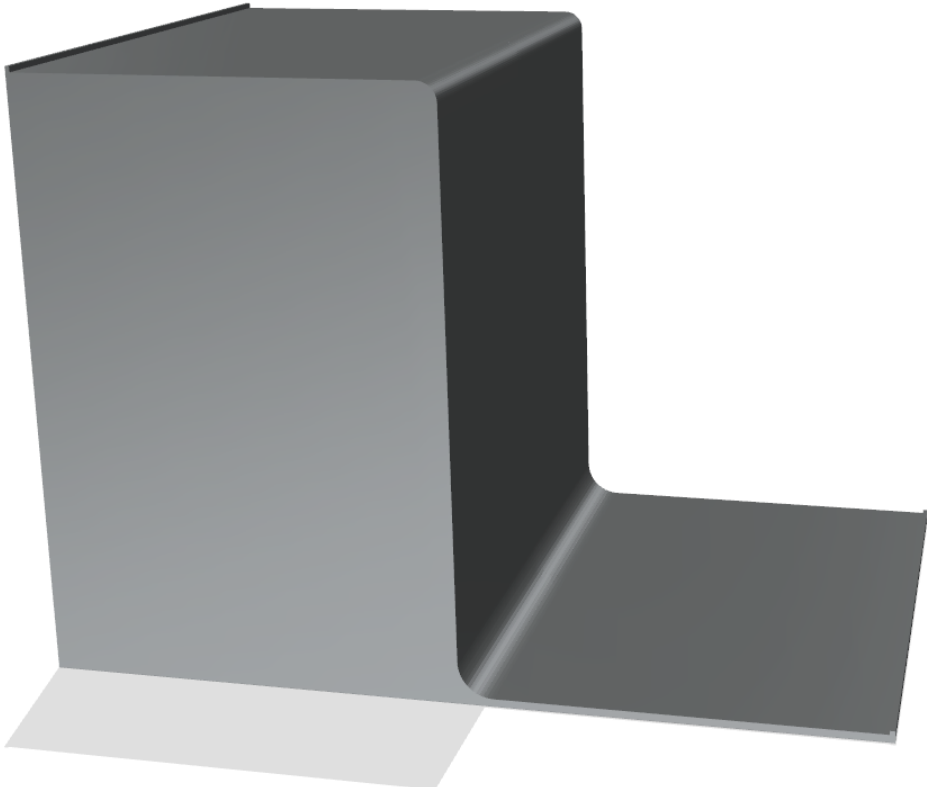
CAD model of the mold obtained using the MM for the Z-shaped part under spring-in deformation.
